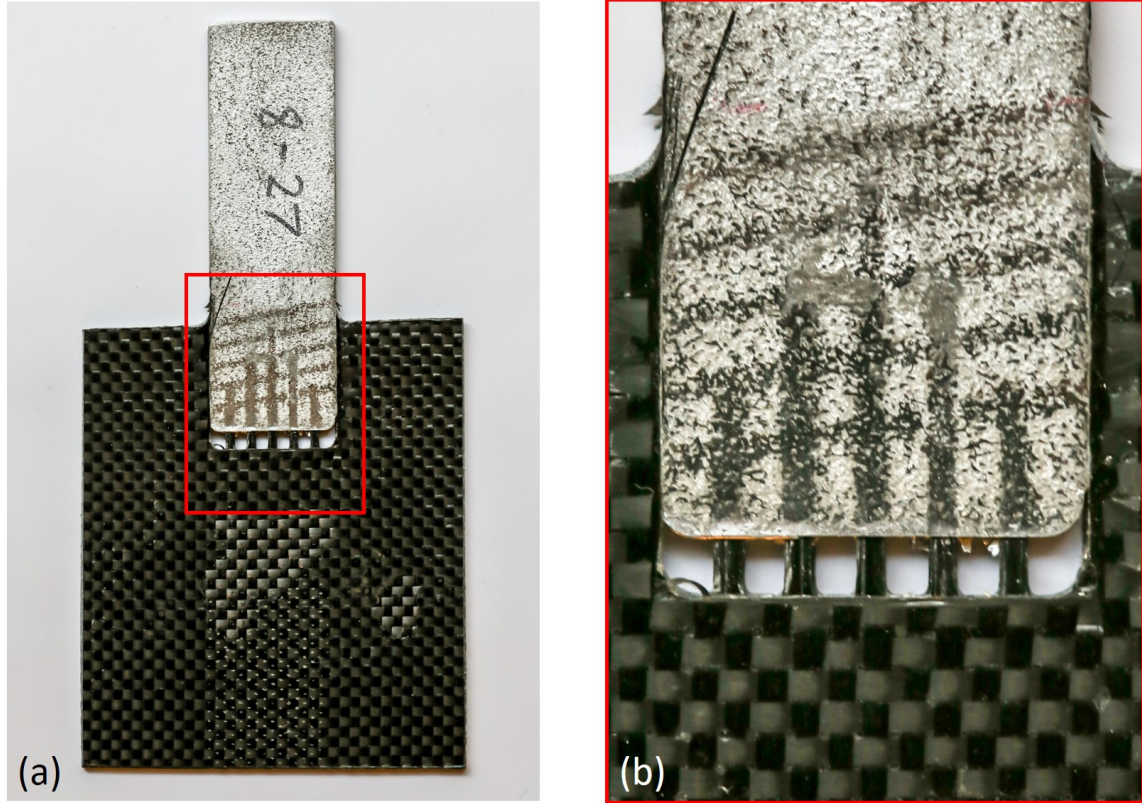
(a) The five embedded layer CF-Al joint after tensile testing. (b) Failed joint detail.
